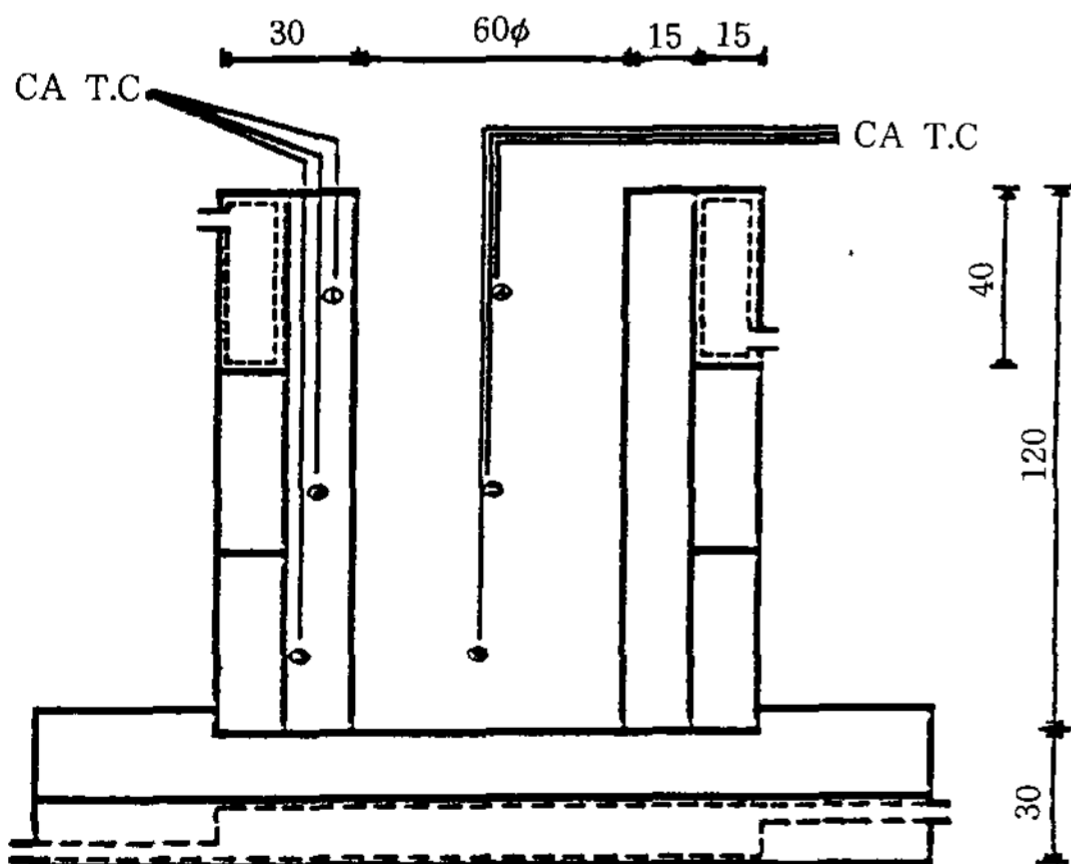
Cylindrical metallic mold and thermocouple demension.(mm)
